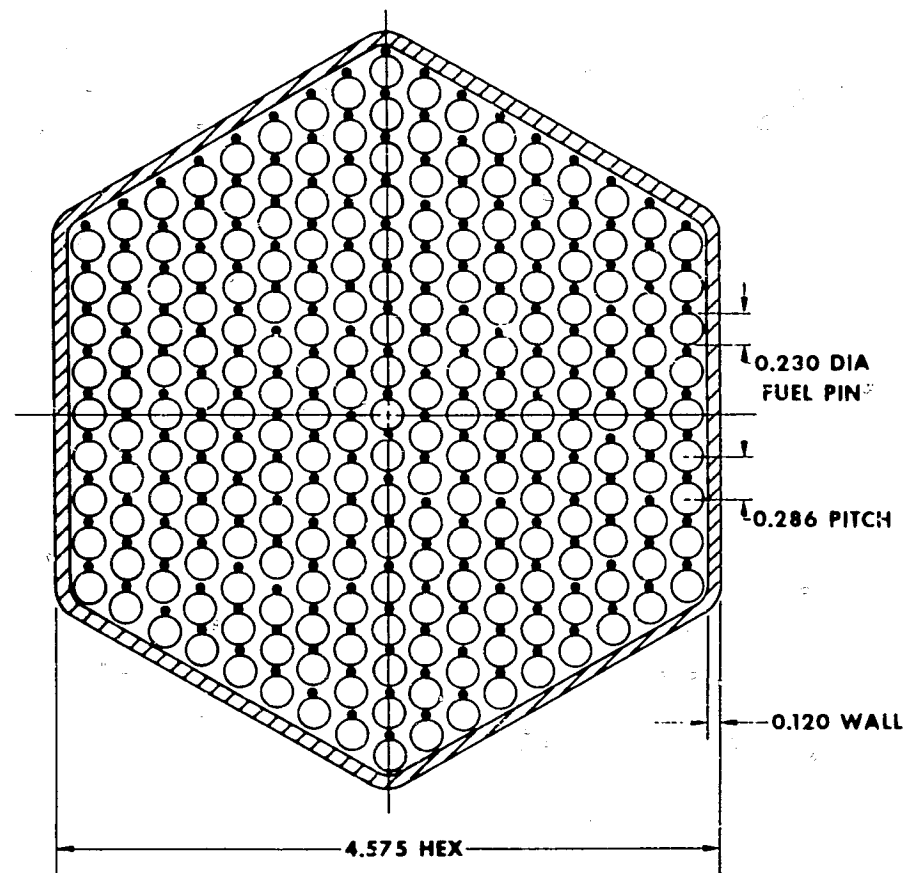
Fuel Assembly Cross Section Thru Core
